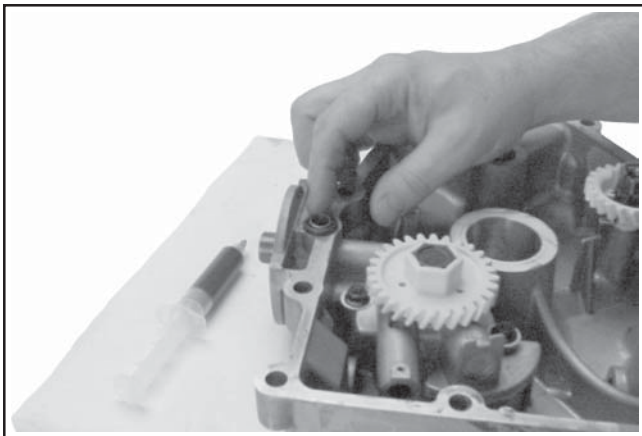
Installing O-Ring in Groove of Oil Pan.
